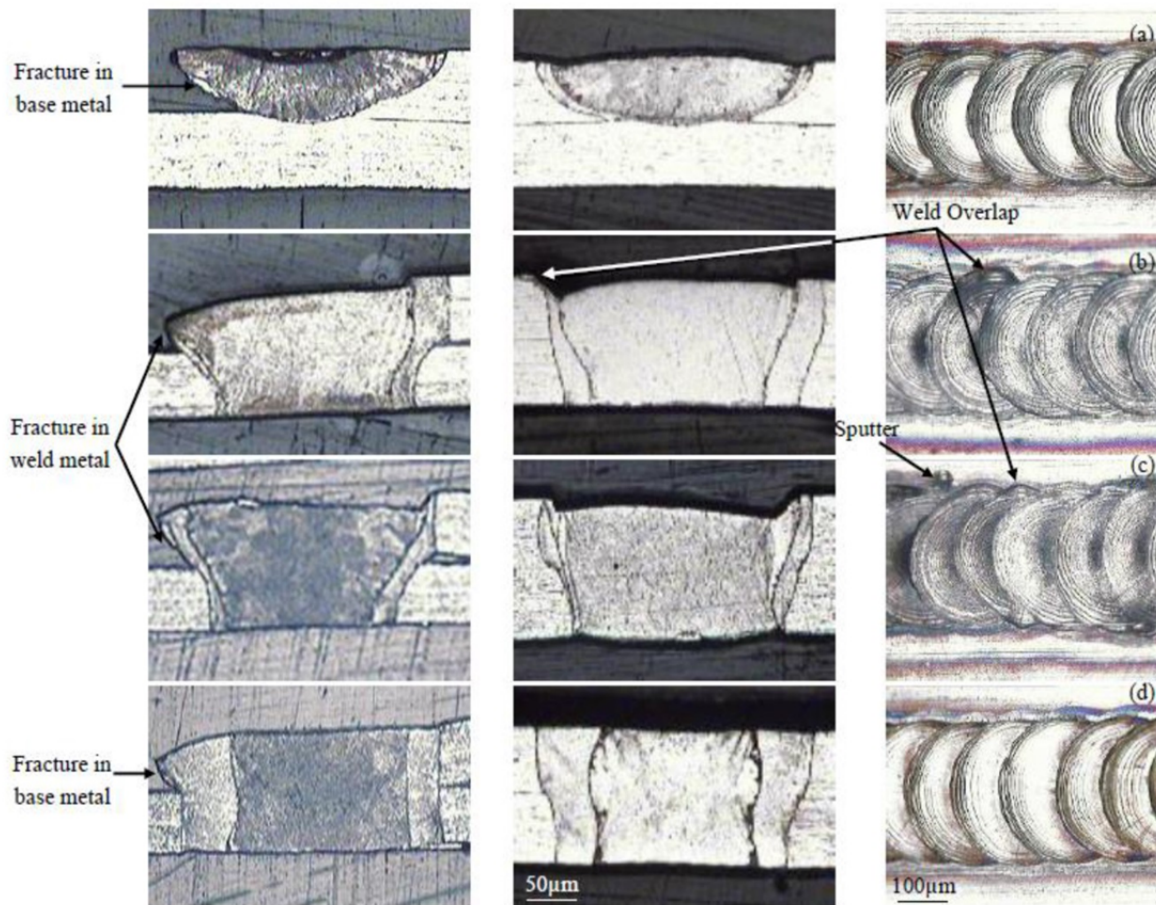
Optical microscopy images of the weld surface, the weld section and the fracture position a- point I, b-, point II, c- point III, and d- the point IV shown in Fig. 5 (welding conditions of the point I equal to $Tp=2ms$ and $P=260W$, the point II equal to $Tp=2ms$ and $P=520W$, the point III equal to $Tp=3ms$ and $P=520W$ and the point IV equal to $Tp=3ms$ and $P=260W$).
